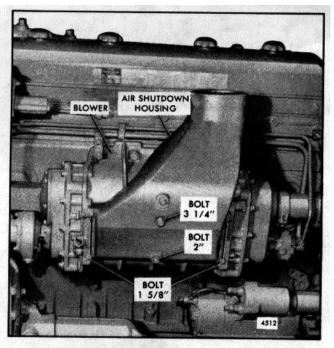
Air Shutdown Housing Mounting and Bolt Location
